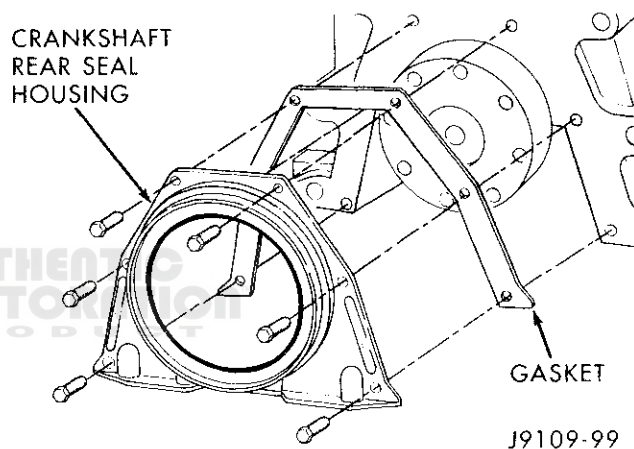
Crankshaft Rear Seal Housing/Gasket
